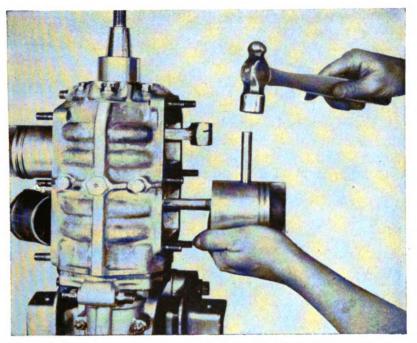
To remove piston pin, tap out pin with a piston-pin punch.
